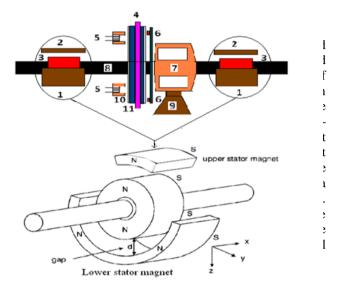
Bearing Construction and configuration of the magnets for horizontal shaft magnetic bearing
